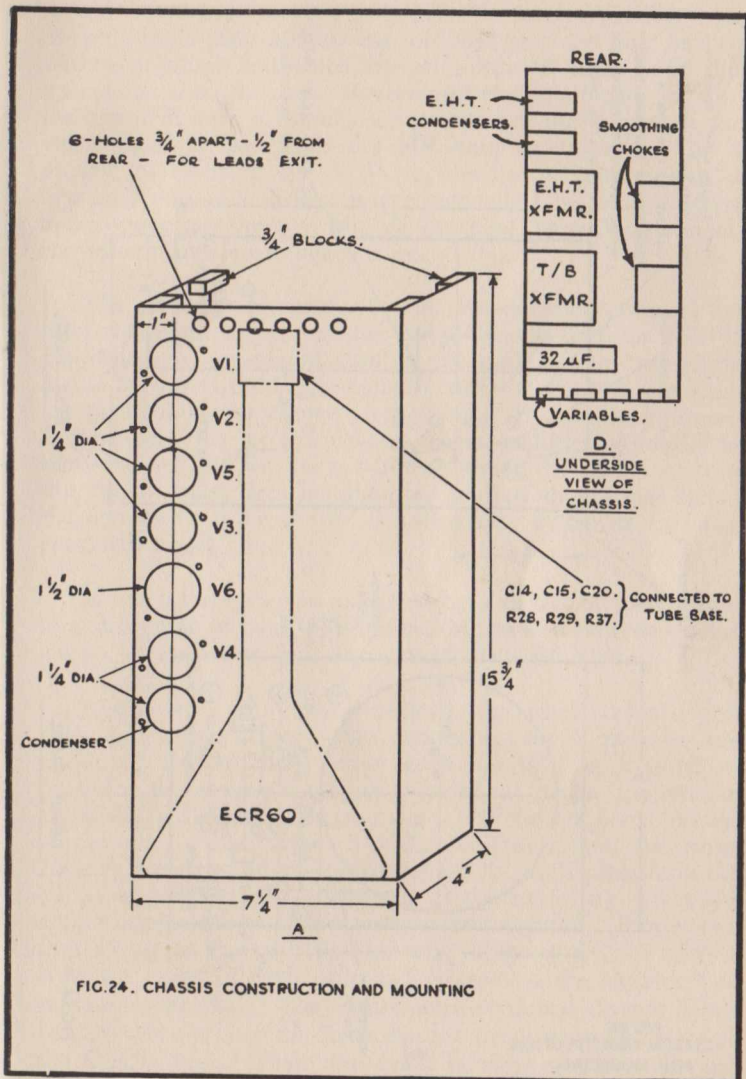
CHASSIS CONSTRUCTION AND MOUNTING
